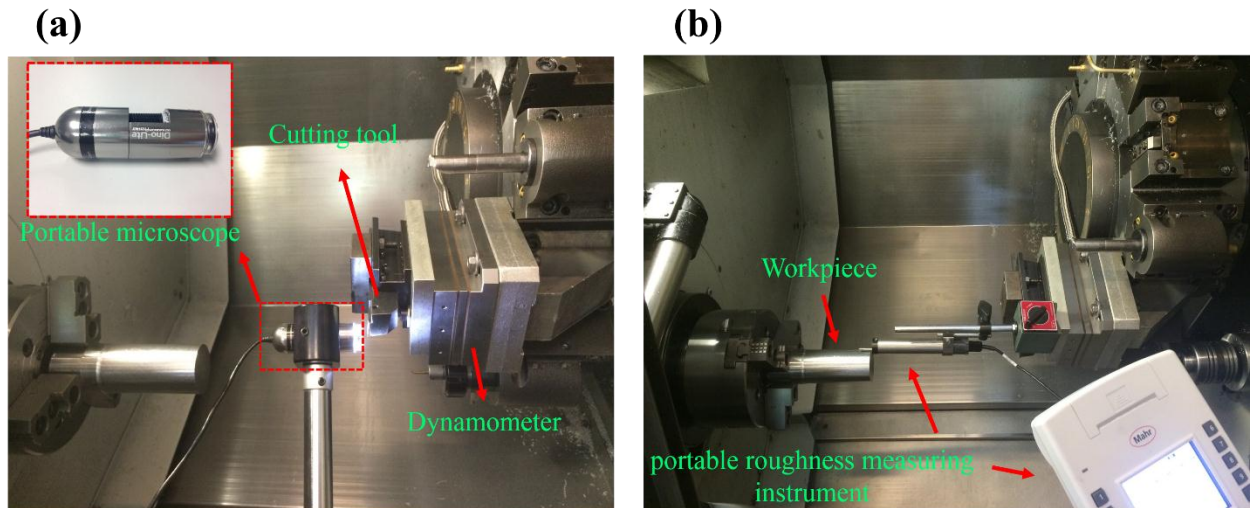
a) Tool wear measurement method using portable digital microscope without removing inserts from tool holder and machine tool. b) Surface roughness measurement strategy using portable roughness measuring instrument without detaching workpiece from spindle.
